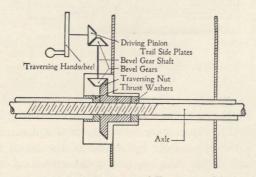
Schematic Drawing of Traversing Mechansim.
